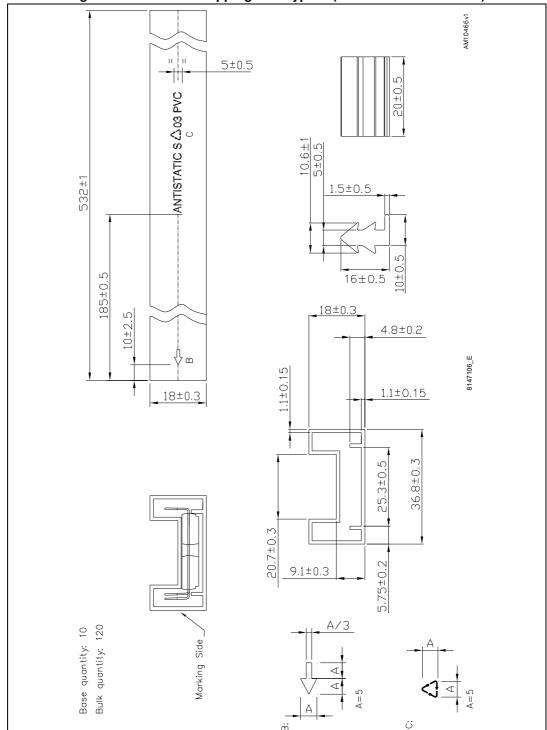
SDIP-38L shipping tube type B (dimensions are in mm.)
